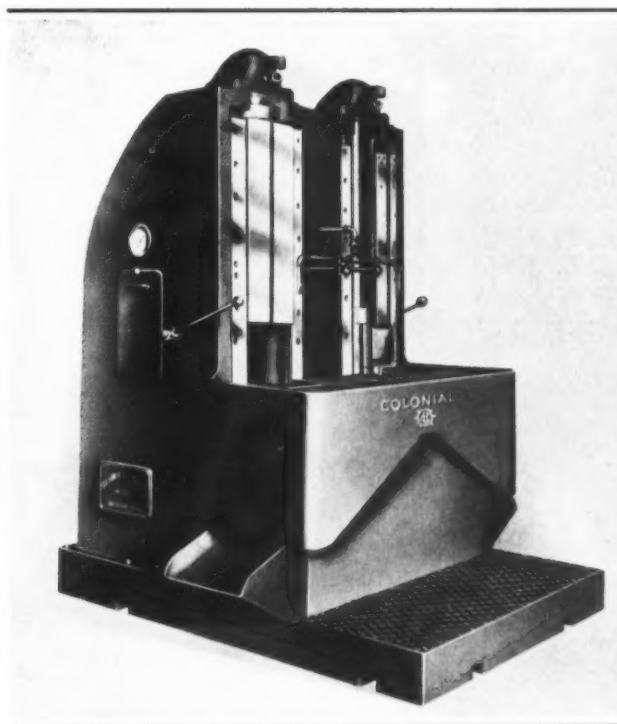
Dual-ram Surface Broaching Machine which is Equipped with Receding Tables. All Broaching Machines Here Shown are Hydraulically Actuated
